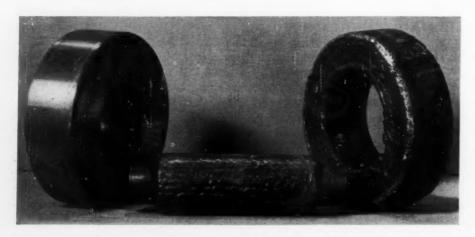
Hard-faced rollers for bending and forming steel angles
